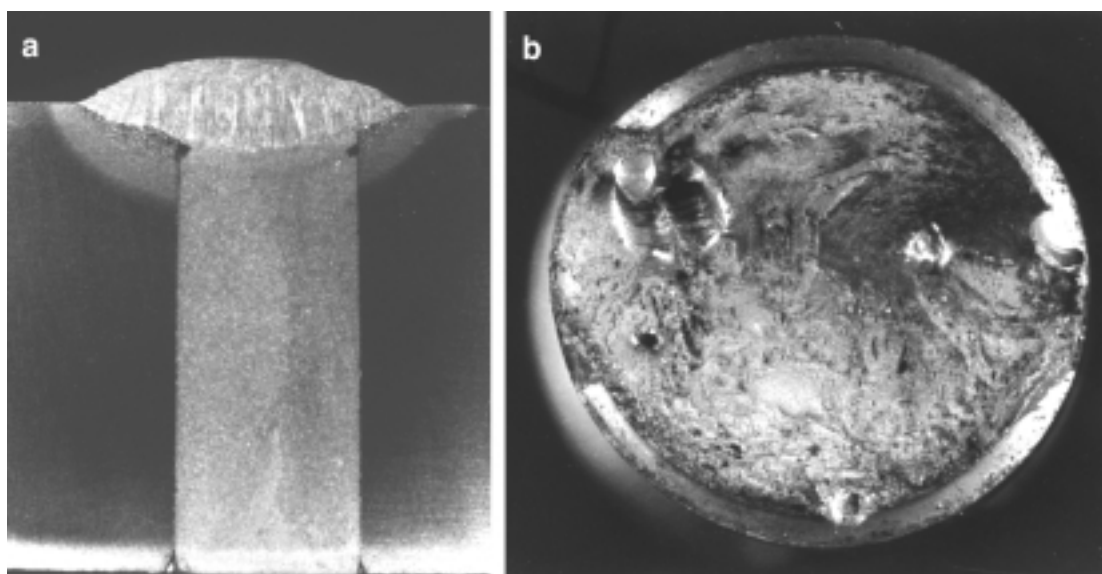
Y-test on the Niomol 490K steel executed with an EVB NiMo electrode at room temperature. Cold cracking appeared in the weld bead.
